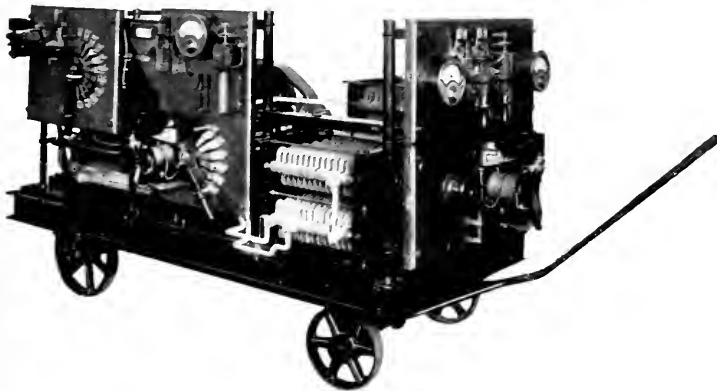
Generator and Welding Panel with Auxiliary Welding Panel and Starting Panel Mounted on a Truck with Starting Rheostats and a Direct-current Driven Motor and Generator Set
